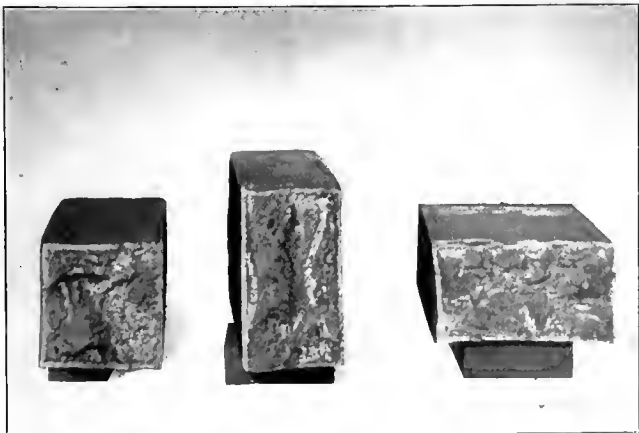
End View of Test Pieces showing Depth of Hardness and Character of Fracture
